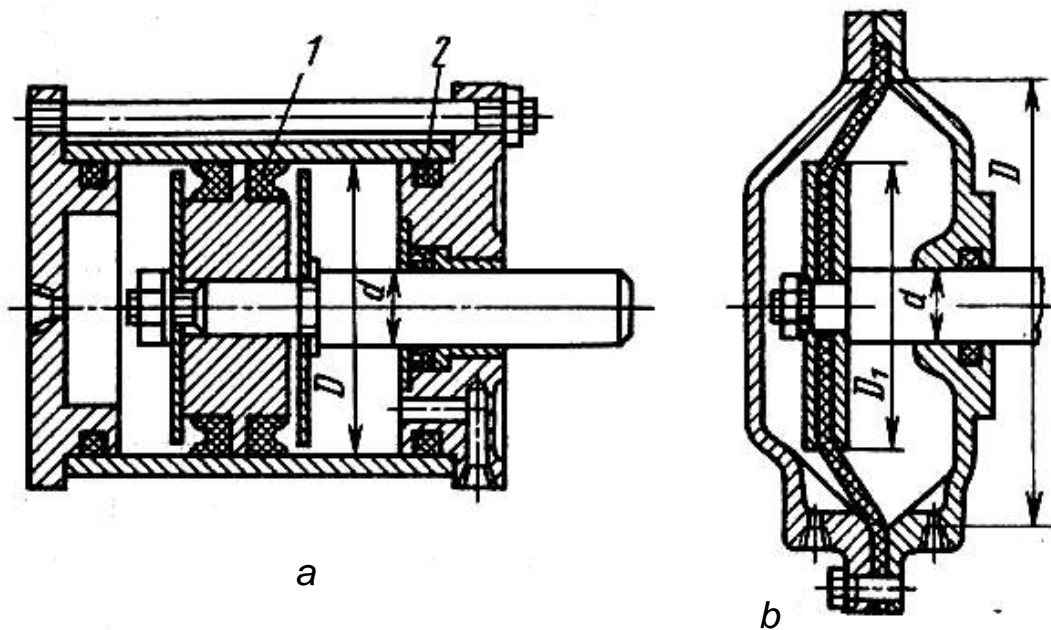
Types of pneumatic motors of double action: *a* – piston; *b* – chamber; 1 – lip-type seal; 2 – O-ring
